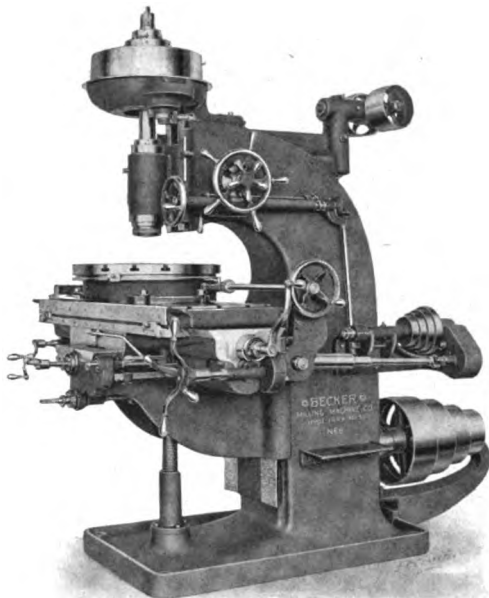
No. 6 Vertical Milling Machine with Rotating Table
